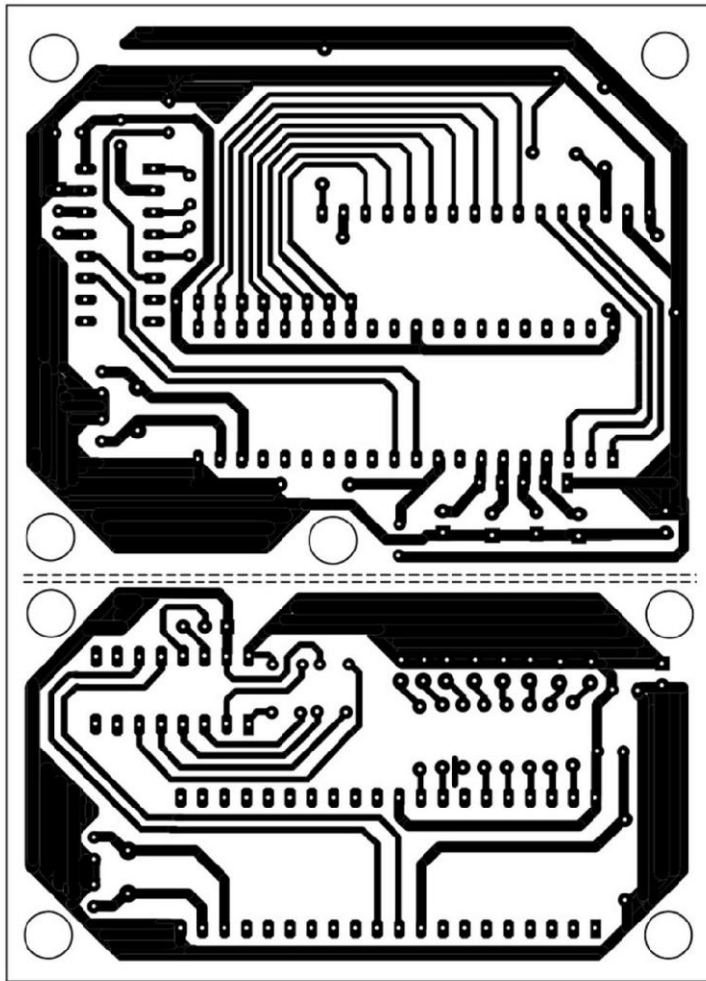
Actual-size, single-side PCB layout for the handheld unit comprising LCD module (above) and the control unit (below)
